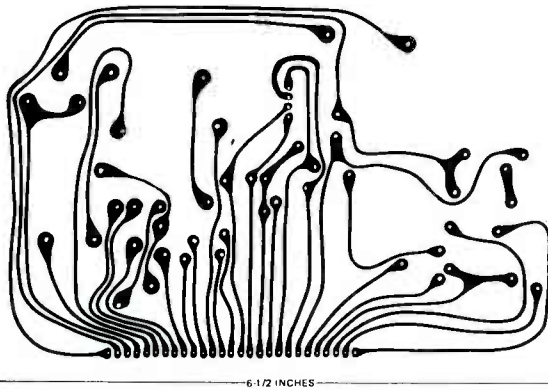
THE COMPONENT SIDE OF BOARD 1. Note the pads for the male header at the bottom of the pattern. Once again this board is shown half-size.
